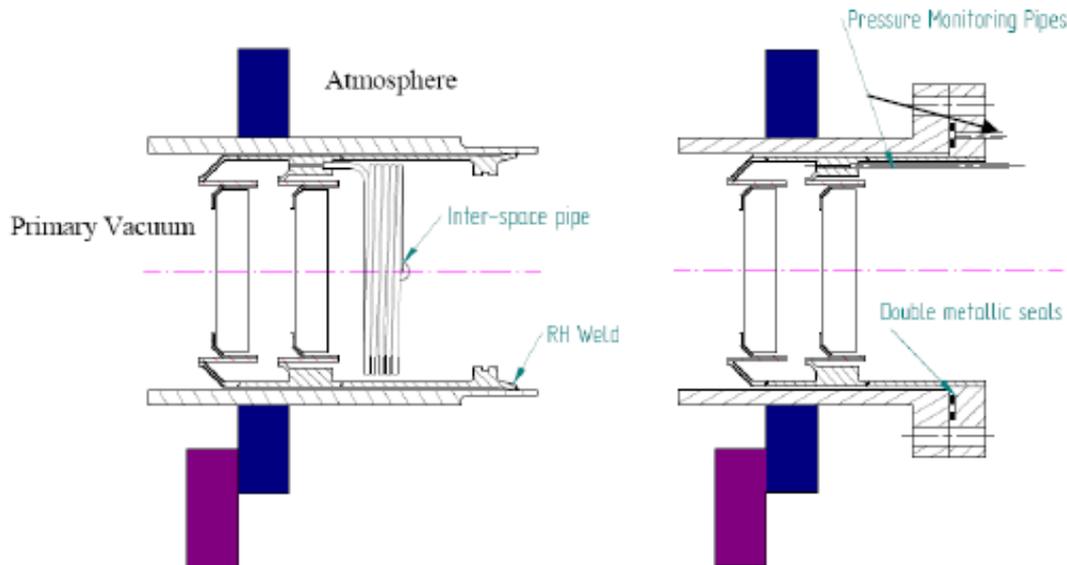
Options being considered for the window arrangements. This includes a bolted and welded flange.
